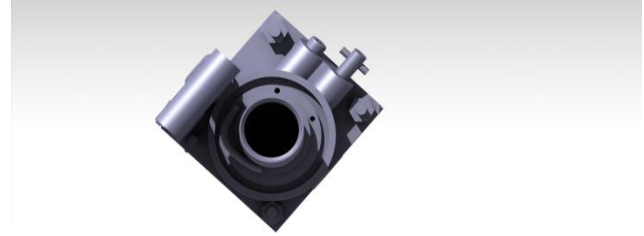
3-D drawing of the Bottle jack- Model No. QYLS5
